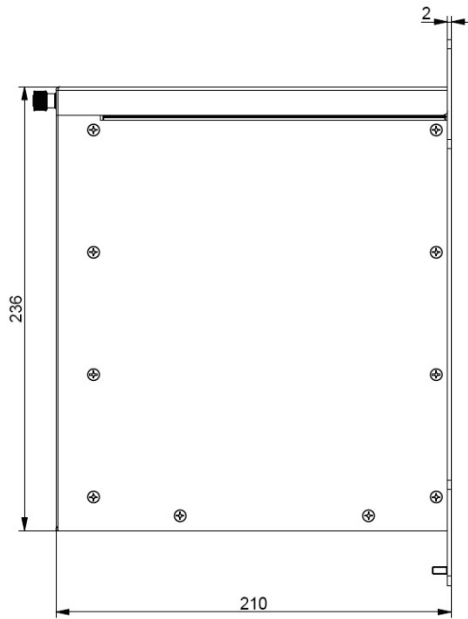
Dimensions: front side with key holes (KBox C-102-2)
